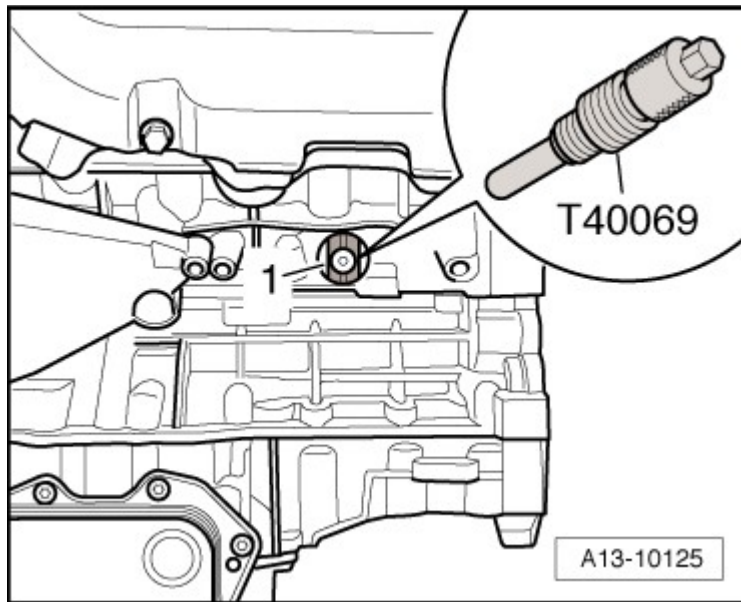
Identifying Crankshaft Holder T40069 In Hole, Removal/Installation
